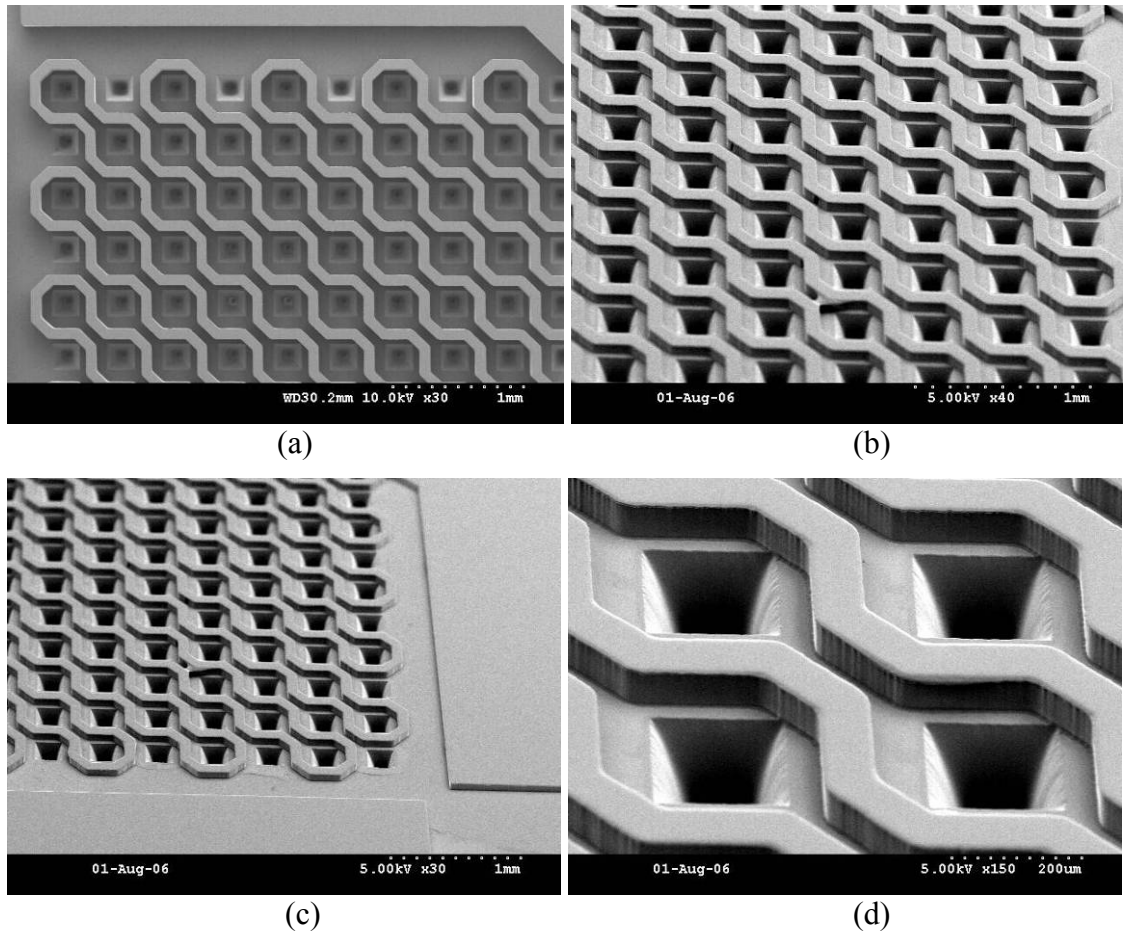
Fabricated double-layer SU-8 mold; (a) Top view, (b) Oblique view of the center of the mold, (c) Oblique view showing area where micro-via will be formed, (d) Close-up view of the mold
